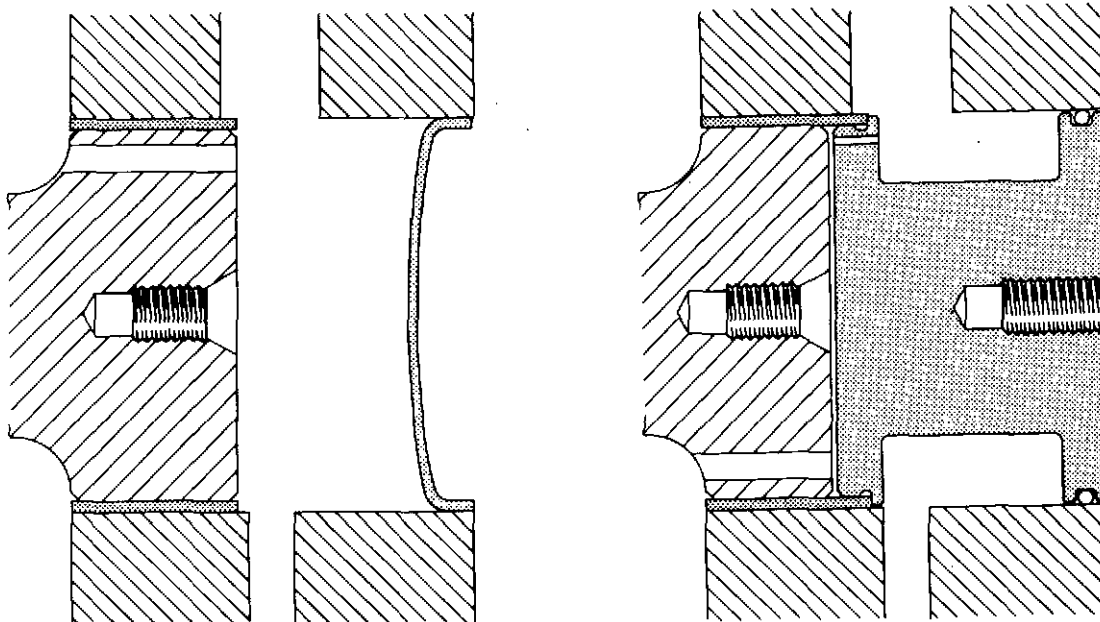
Cam bore plug ('A' bank) Fig. 16 Bobbin type plug ('A' bank)
